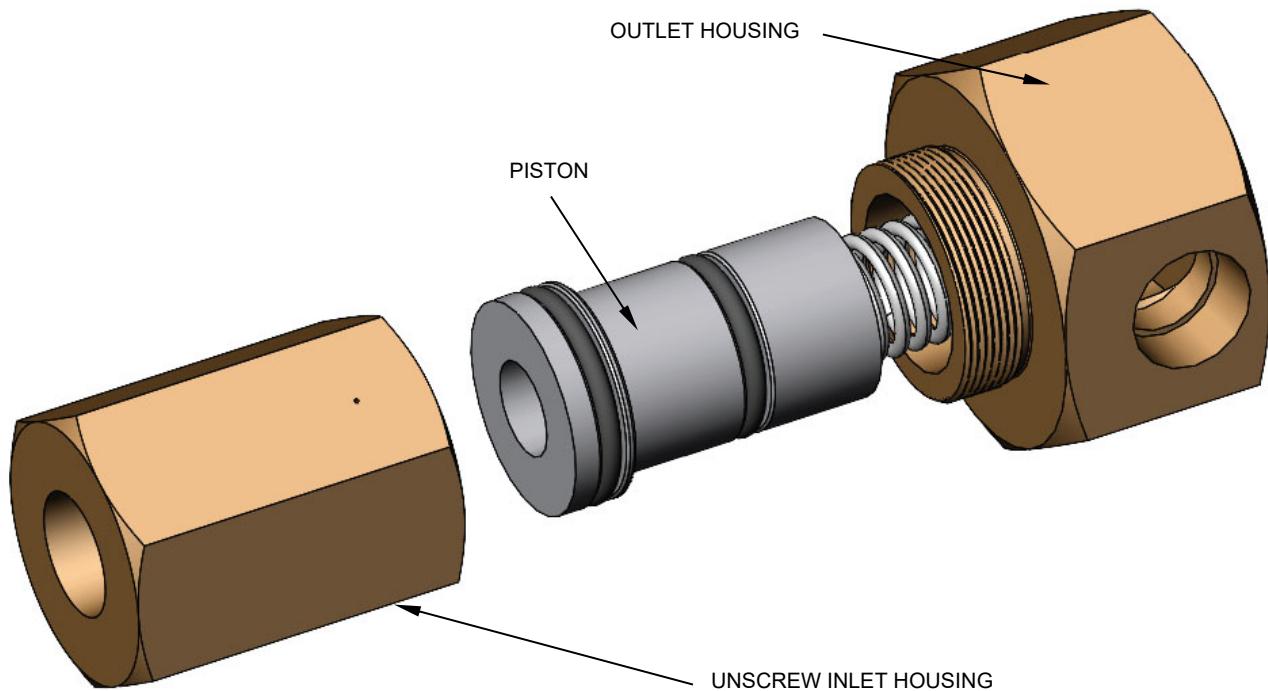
B – STEP 2 – Remove old O-rings and clean all piston surfaces.
